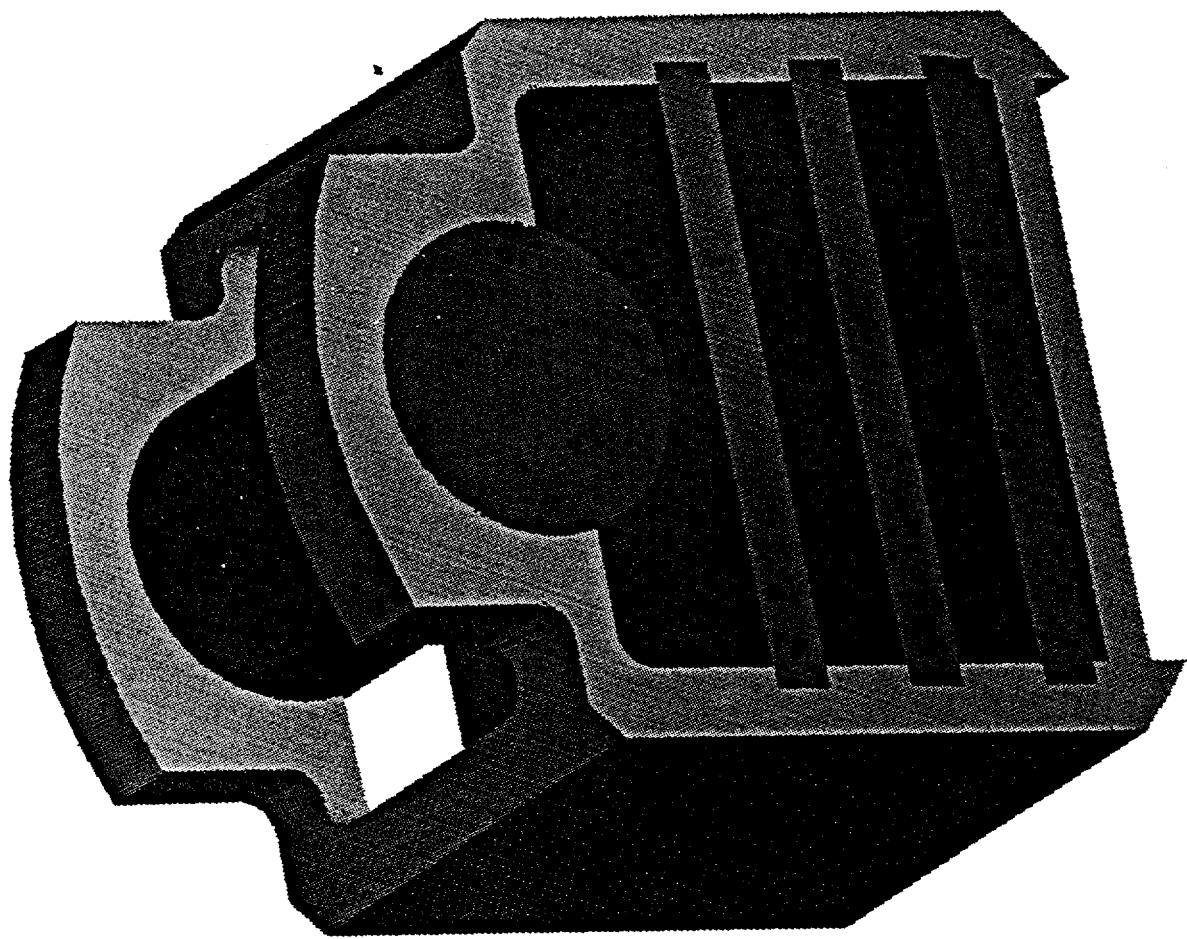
Core pressure boundary tube metal short rod and tensile specimens.
